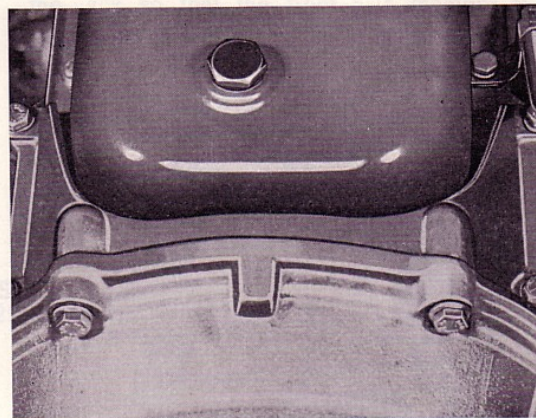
Reinforcing bracket, cylinder block—flywheel housing
